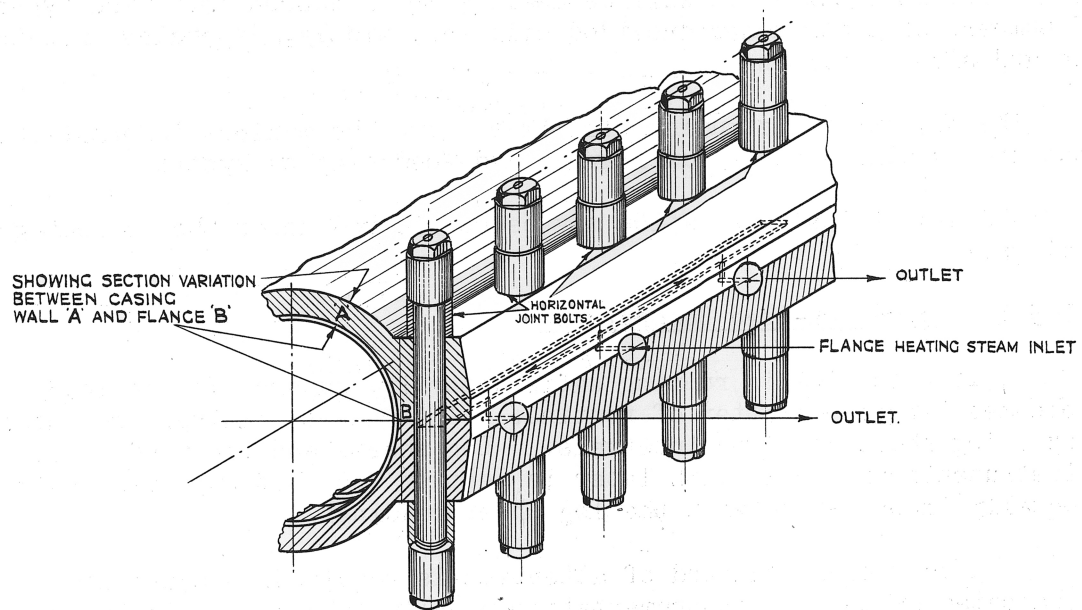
HIGH PRESSURE CYLINDER FLANGE WARMING AND DIFFERENCES IN METAL THICKNESS BETWEEN CASING AND FLANGE
